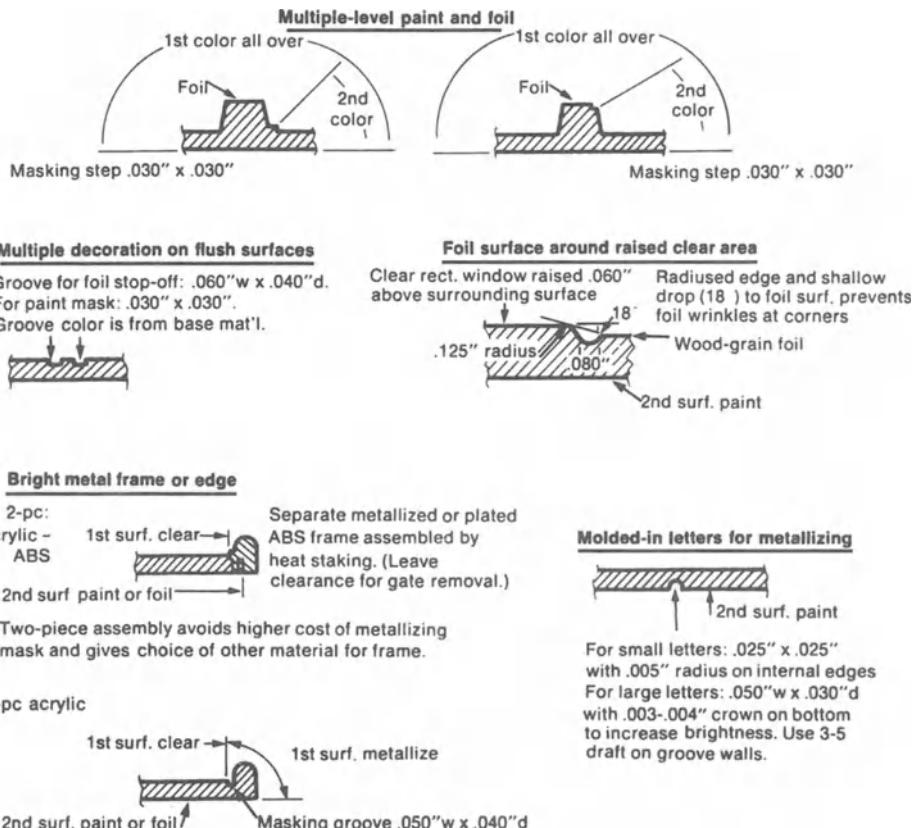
Example of the dimensions recommended for masking and stop-off grooves.
